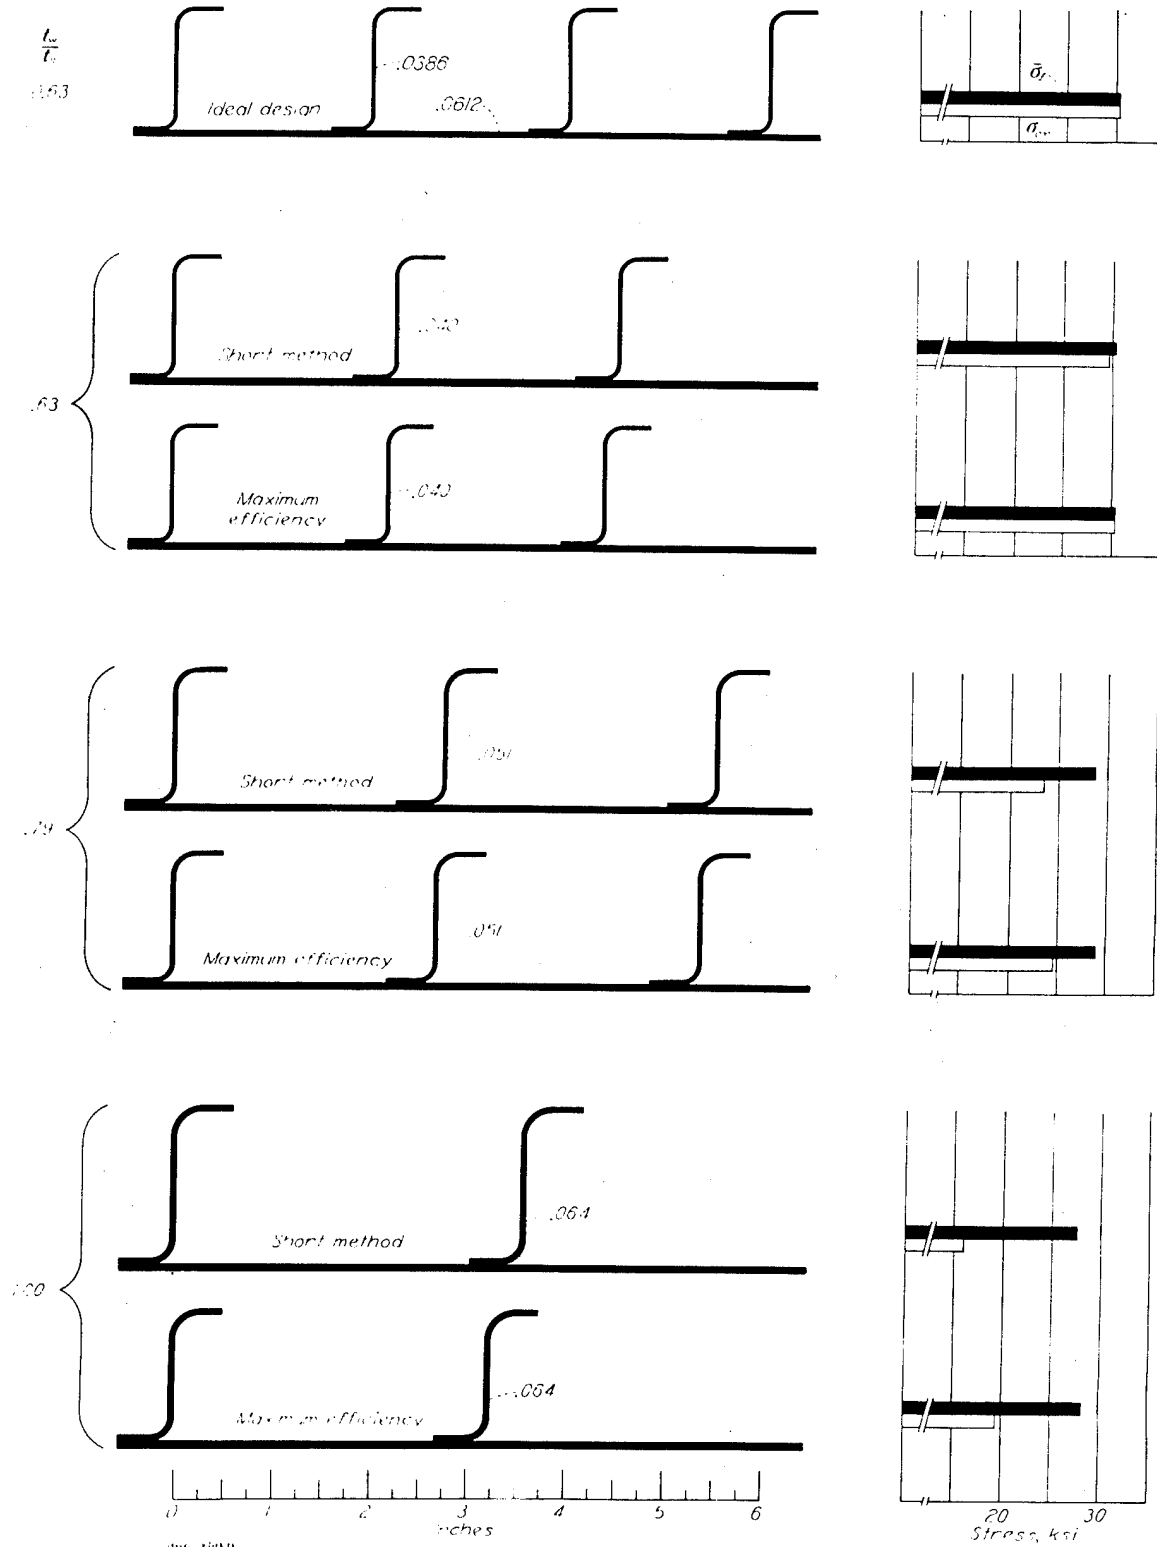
Designs of 24S-T aluminum-alloy panels 20 inches long with  $P_1=3.0$  kips per inch,  $c=1$ , and  $t_s=0.064$  inch.
